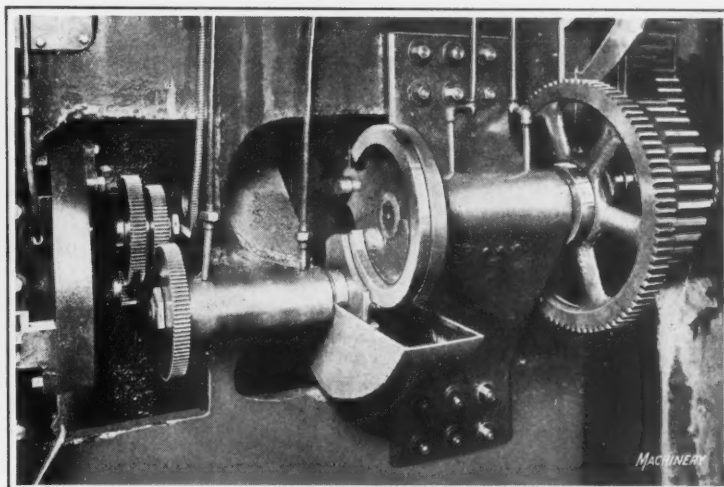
Close-up View of that Portion of the Indexing Mechanism that is on the Side of the Machine
